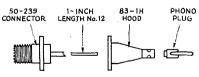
U.h.f. series-to-phone-plug adaptor.
